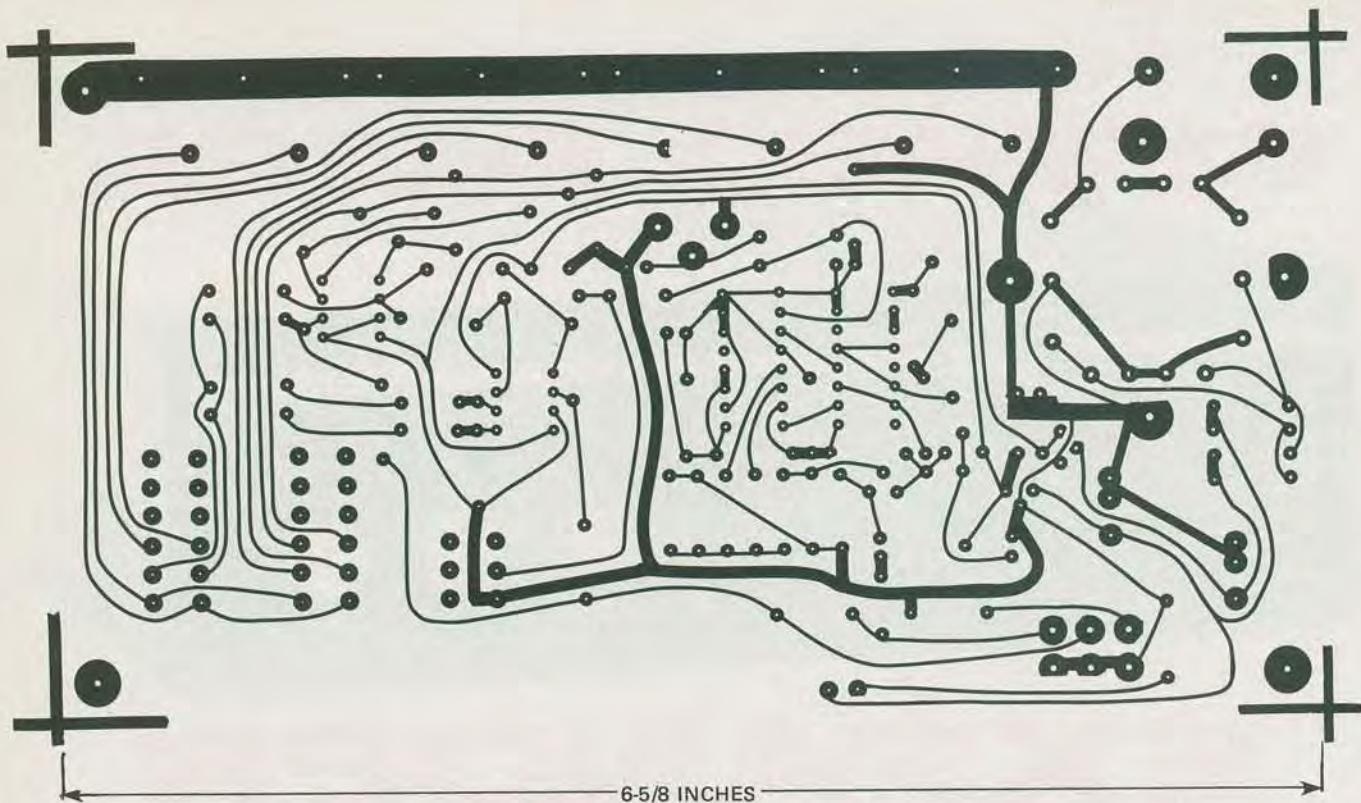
STEREO IMAGE EXPANDER is constructed on single-sided PC board. The use of IC sockets is recommended.
